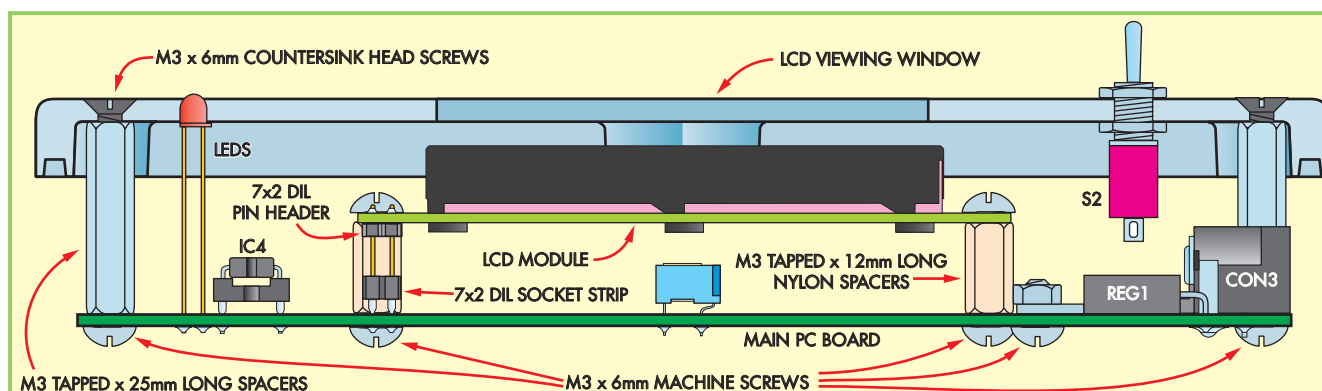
the PC board is attached to the lid of the case via four M3 x 25mm tapped spacers, as shown here. Four M3 x 6mm countersink-head screws secure the lid to the spacers, while four M3 x 6mm pan-head secure the PC board.
